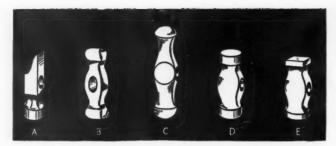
Illustration Showing Various Hammer Shapes Used in Panel-Beating. A—Stretching, Riveting and General Work; B—Stretching, Flanging; C—Blocking and Hollowing; D—Planishing; E—Planishing and Double Curvature Work.
